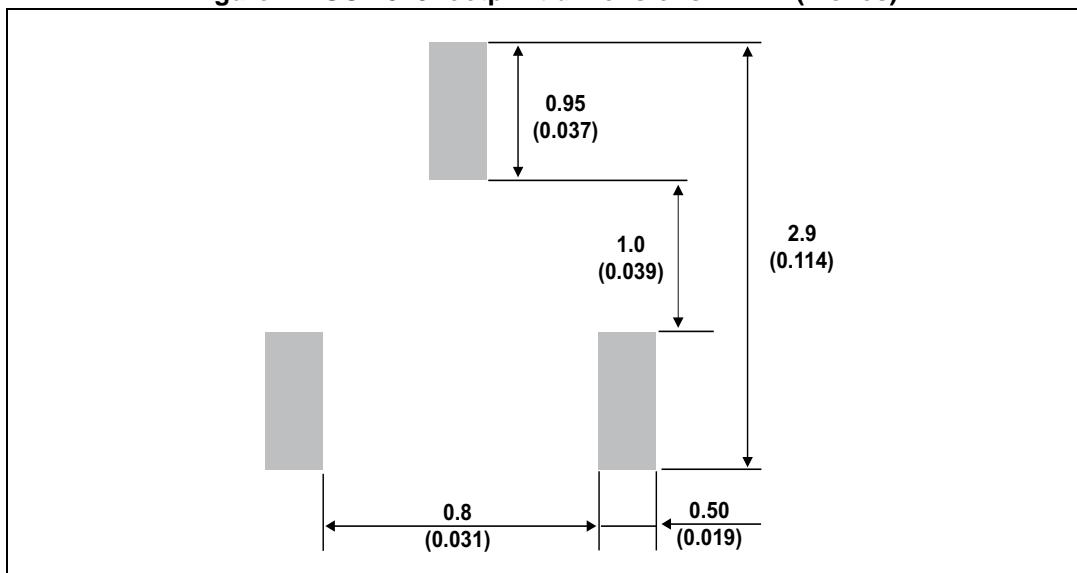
SOT23 footprint dimensions in mm (inches)
